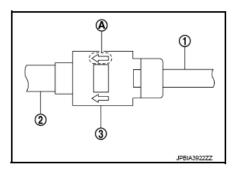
Installing Quick Connector Cap To Quick Connector Connection Courtesy of NISSAN NORTH AMERICA, INC.
